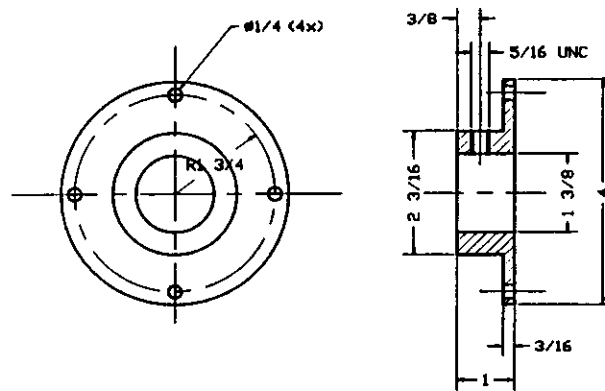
Adapter to fit the slip ring unit to the shaft.
